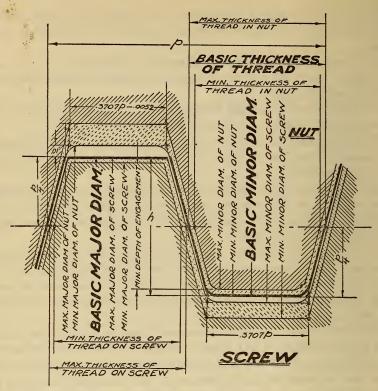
Illustration of allowances, tolerances, and crest clearances, class 1 Acme
